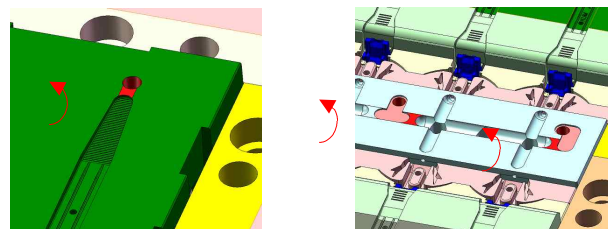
Gas Hole position of band cable metal mold 동일한 성형조건하에서 진공가스빼기를 실시했을 때와 하지
